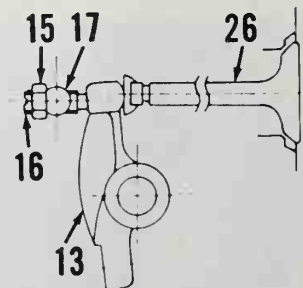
Loosen locknut (15) and turn adjusting screw (16) to adjust compression release. See text.
